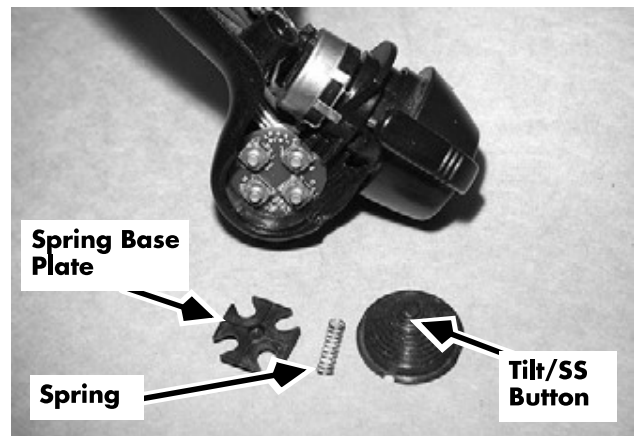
Control Handle, Right Half (EZ Cold Storage shown)
